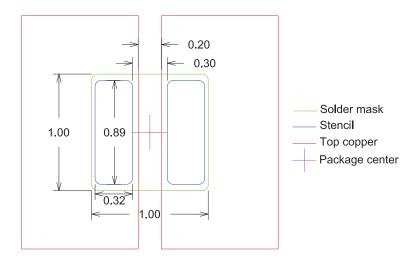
Recommended PCB solder pad layout for LUXEON UV FC1.
